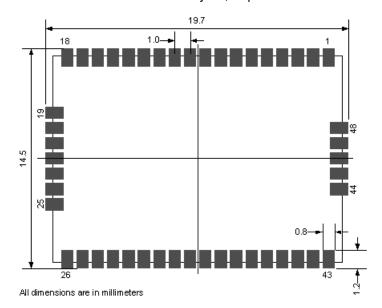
ATZB-900-B0 PCB Recommended Layout, Top View
